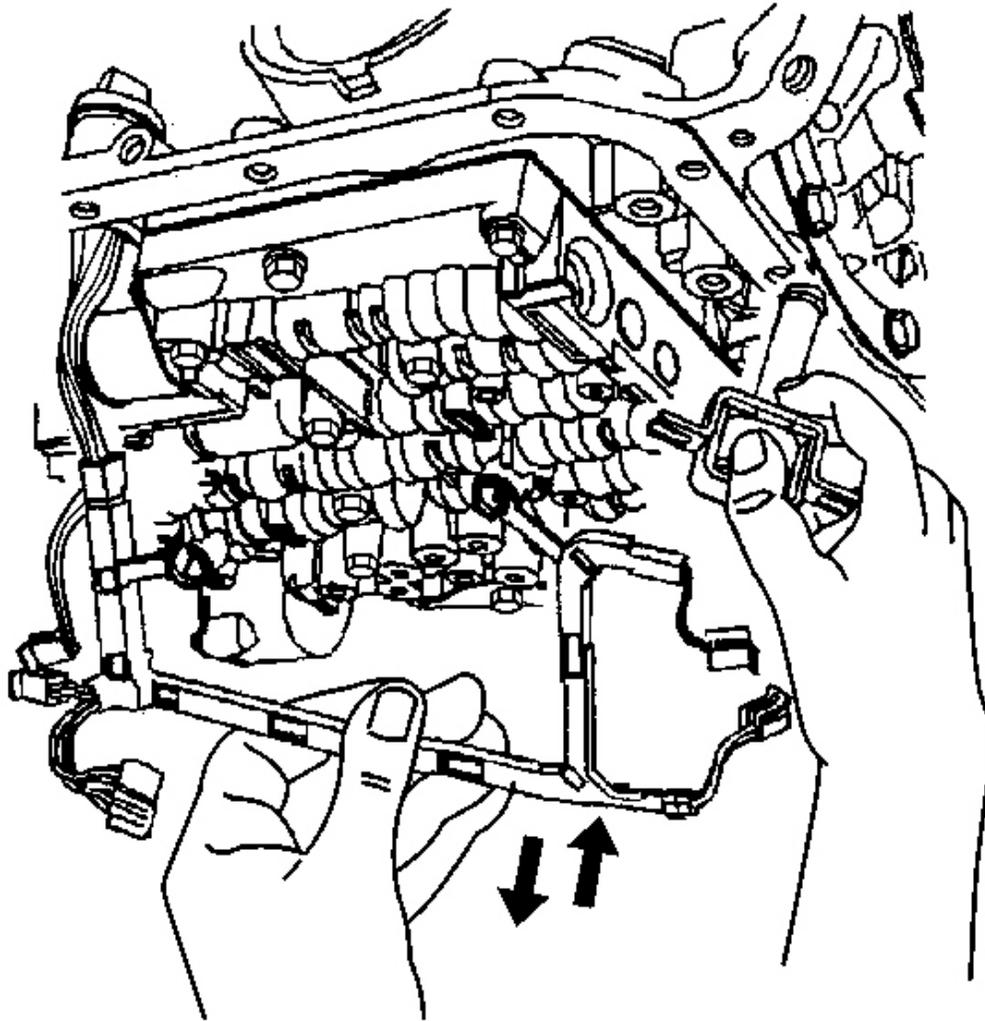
Identifying TCC Solenoid (With O-Ring Seal) & Wiring Harness
